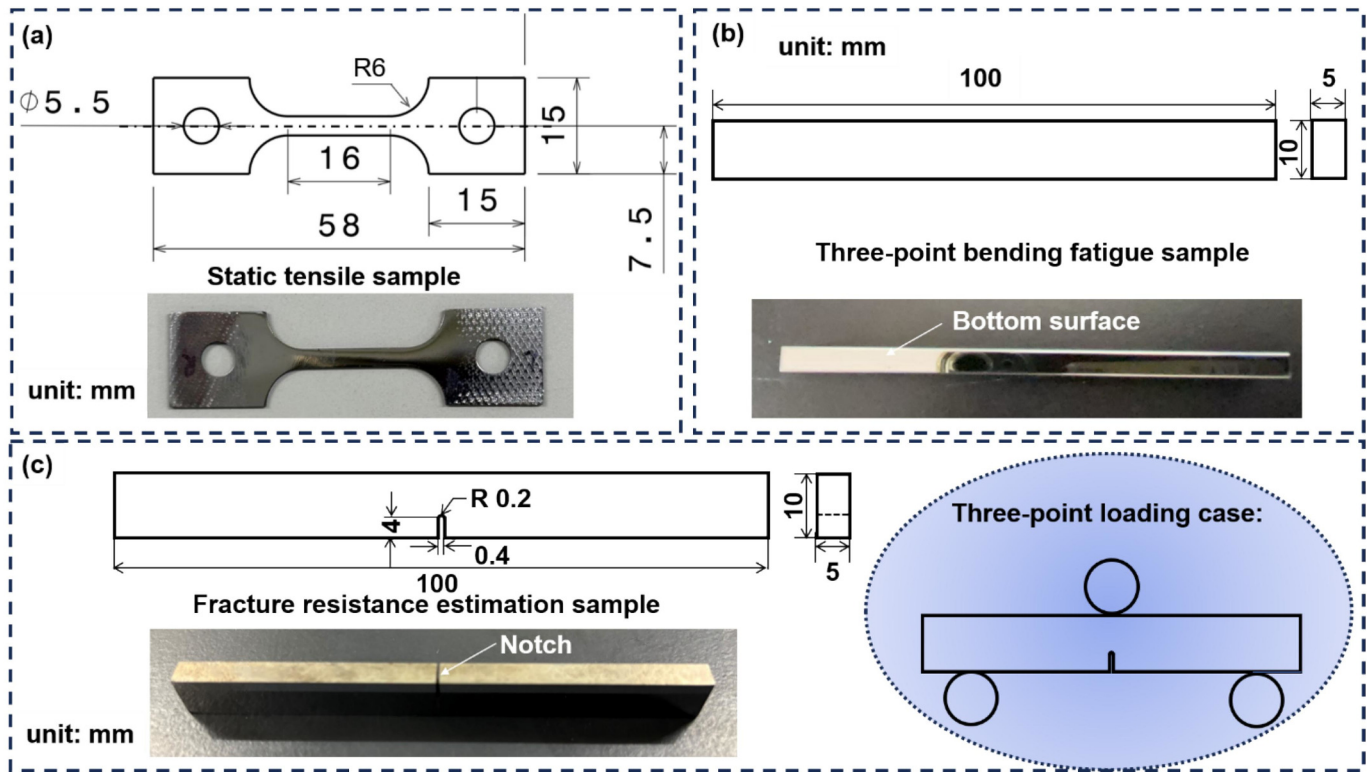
Shape and dimensions of (a) static tensile sample, (b) three-point bending fatigue sample and (c) fracture resistance estimation sample.
